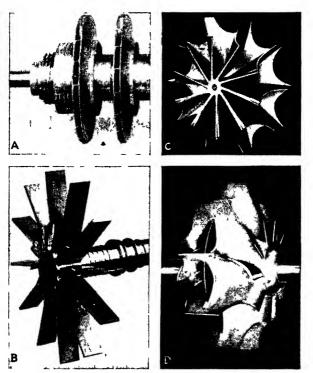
(A) Closed; (B) radial-bladed open; (C) semi-closed, (D) double-inlet impeller. (Courtesy of Roots-Connersville Blower Corp. and B. F. Sturtevant Co)
